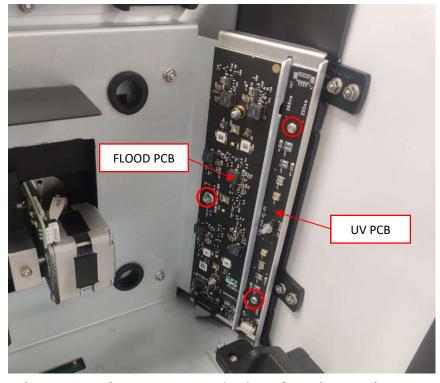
1x (5.5mm Driver) retaining nut on Flood PCB & - 2x (T10 Torx) screw on UV PCB.
